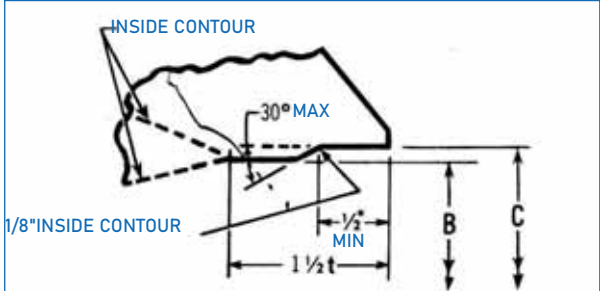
Welding End for Continuous Rectangular Backing Ring (Inside Contour).
